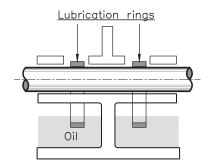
Schematic diagram showing splash oil rings lubricating a bearing.
